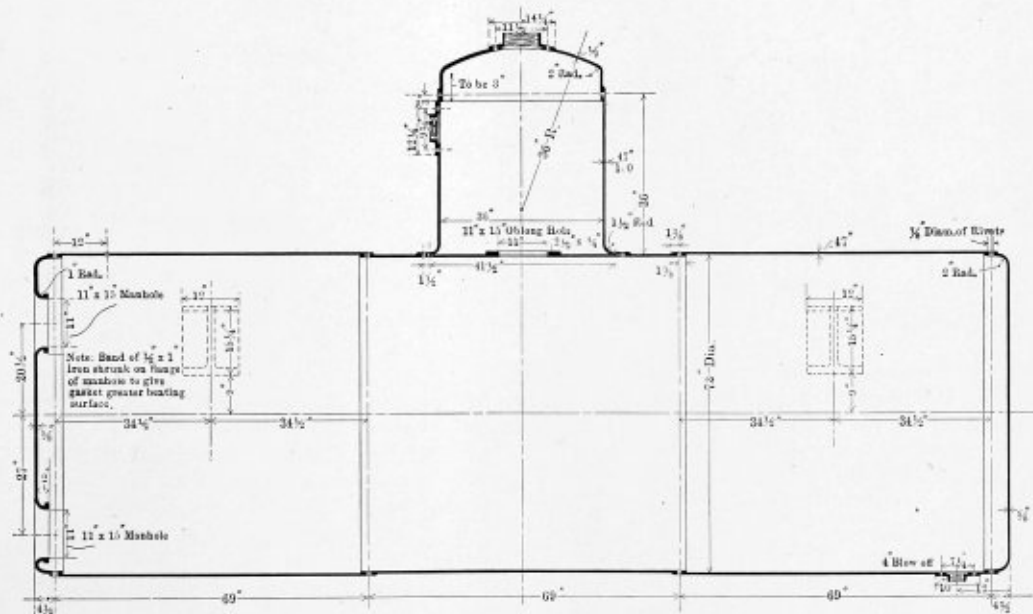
SHELL, HEADS AND DOME ASSEMBLED, SHOWING PRINCIPAL DIMENSIONS.
